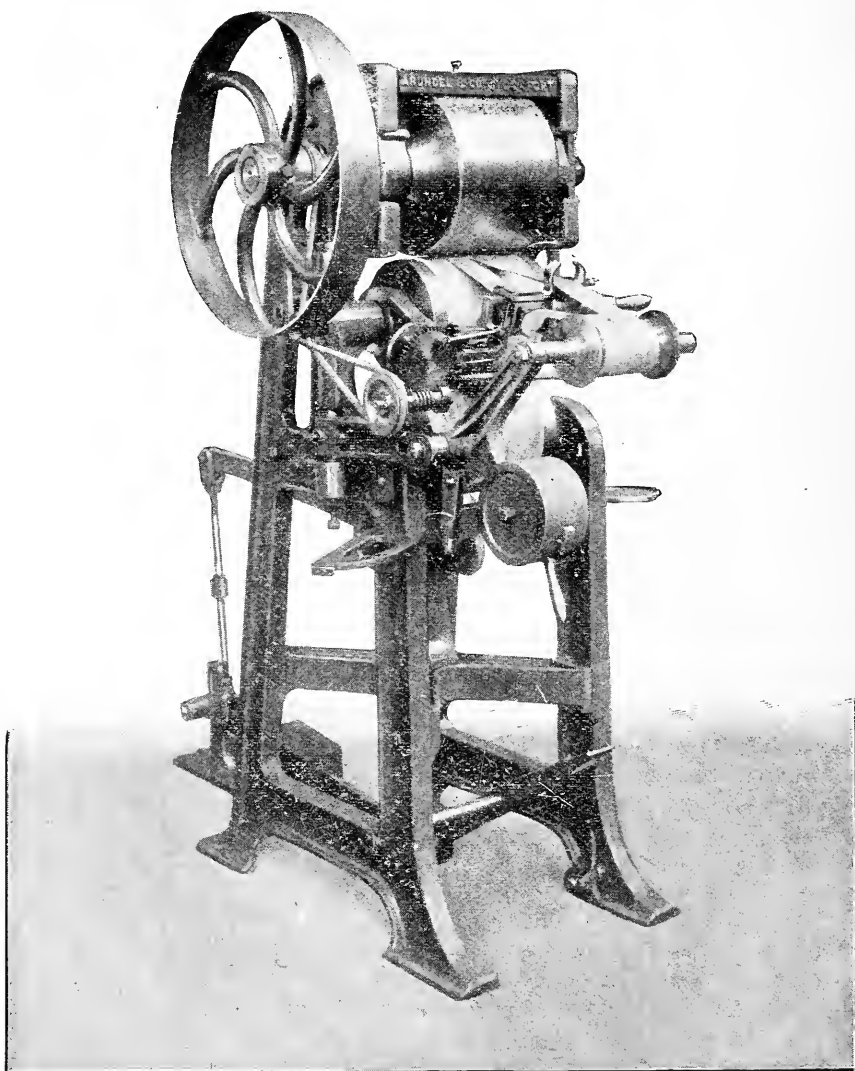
Improved yarn preparing machine. (Made by Messrs Arundel & Co., Stockport.)
